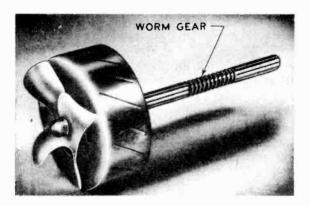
A worm gear has been cut in the shaft of the rotor of this commercial motor. This worm drives the turntable through a gear on the turntable shaft. See C and D of Fig. 35.
